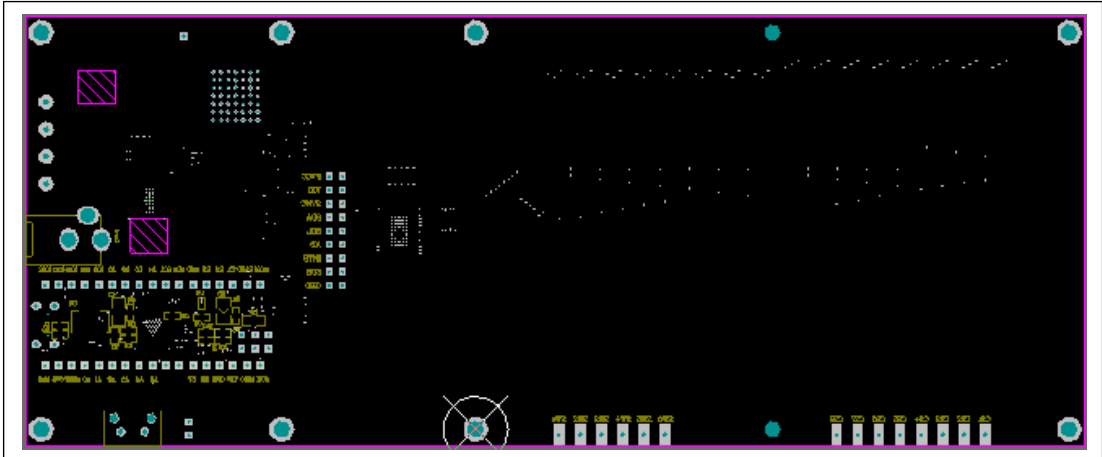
Board Component Placement Guide - Bottom Layer: V01A
